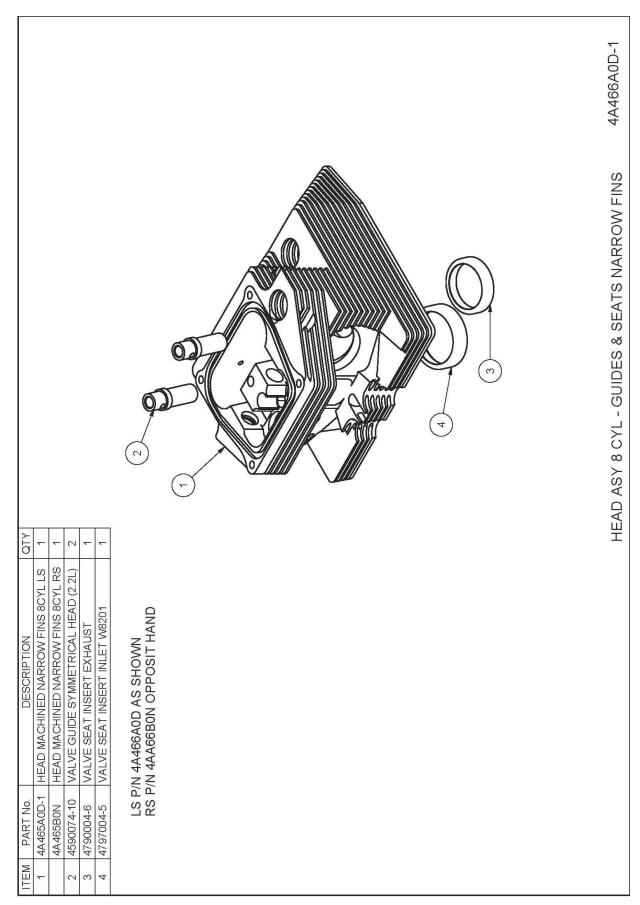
Head, Valve Guides & Seats Assembly Narrow Fins S/N 34 on
